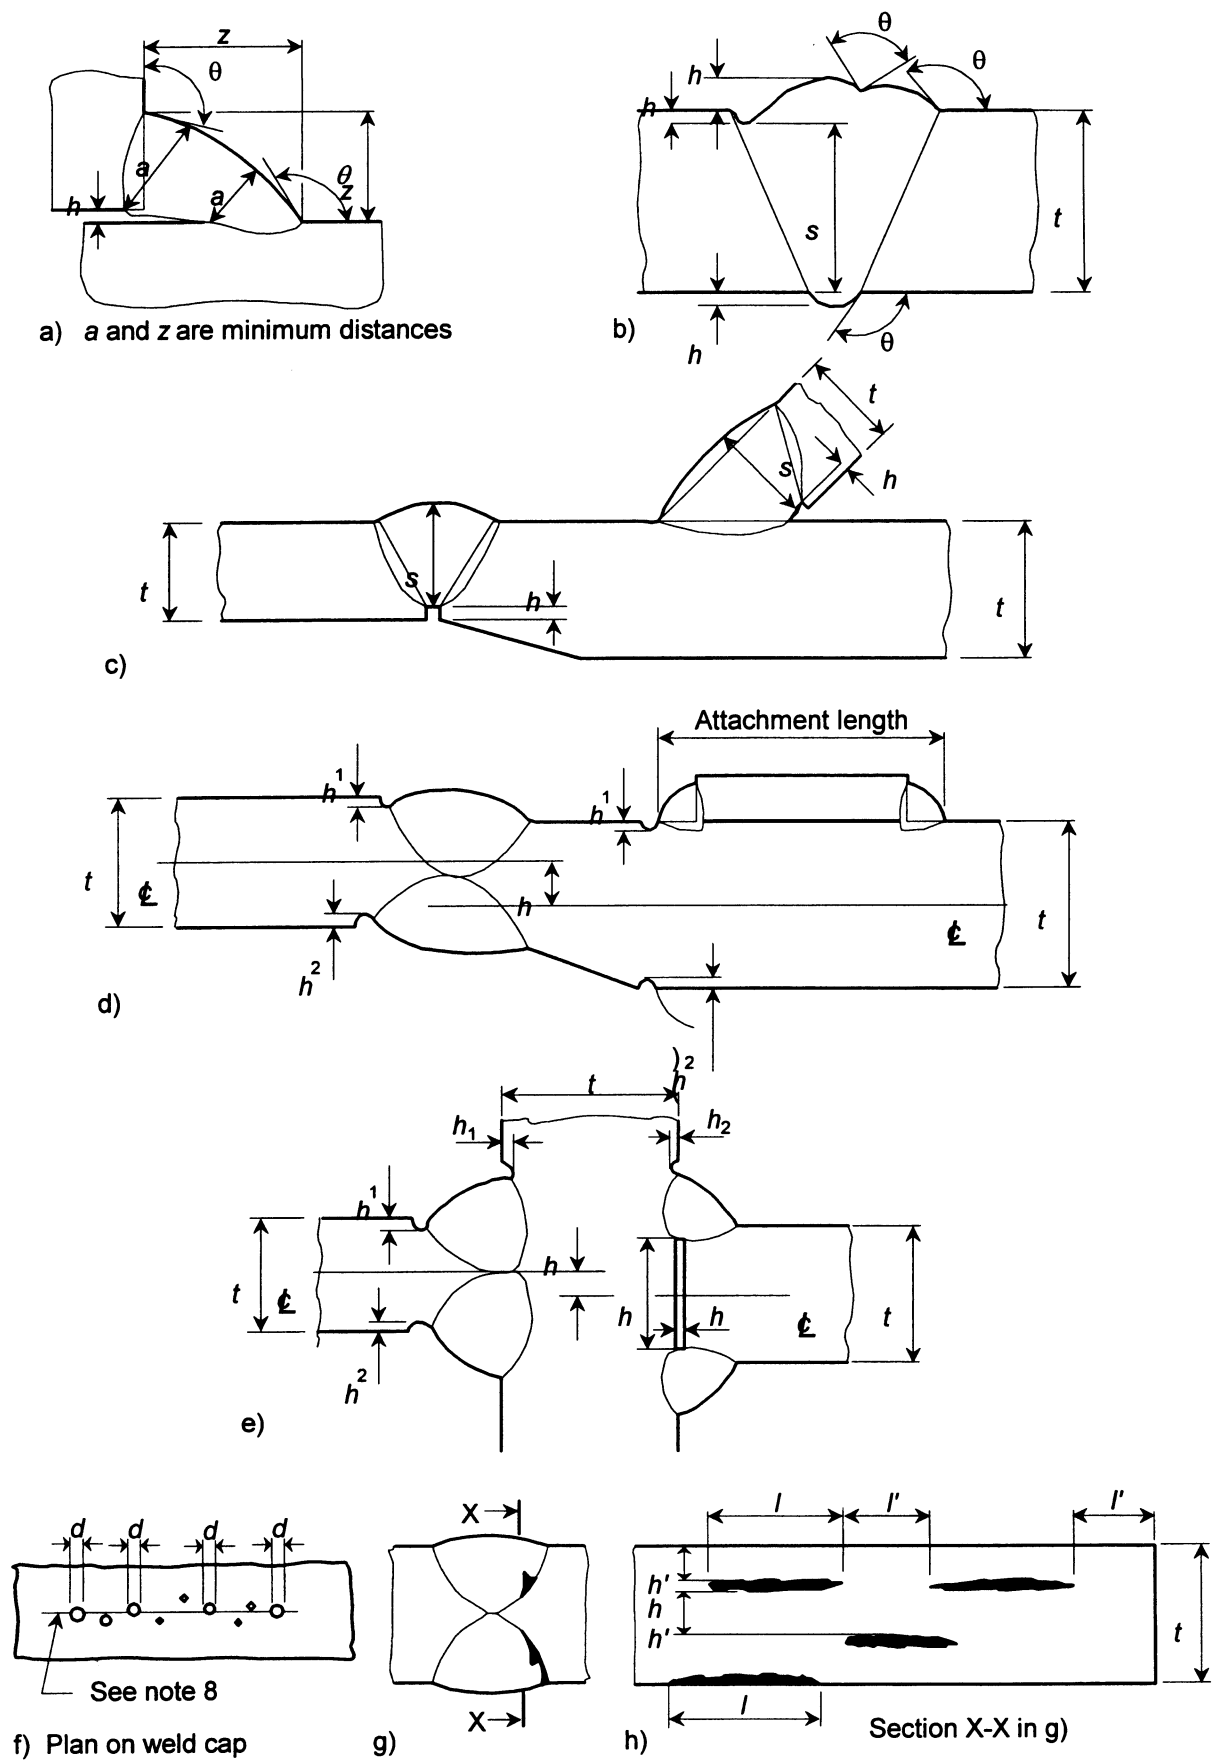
Dimensions of weld discontinuities
